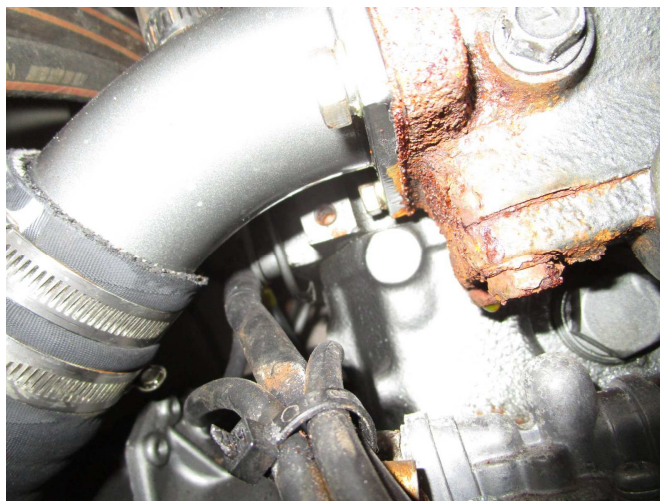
Corrosion on exhaust manifold at flange of elbow
